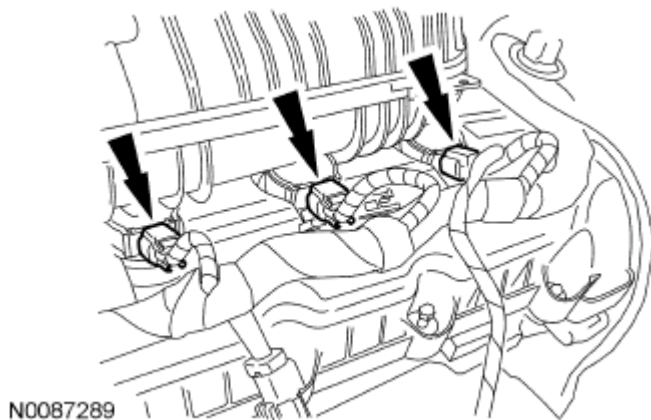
Locating RH Coil-On-Plug Electrical Connectors
